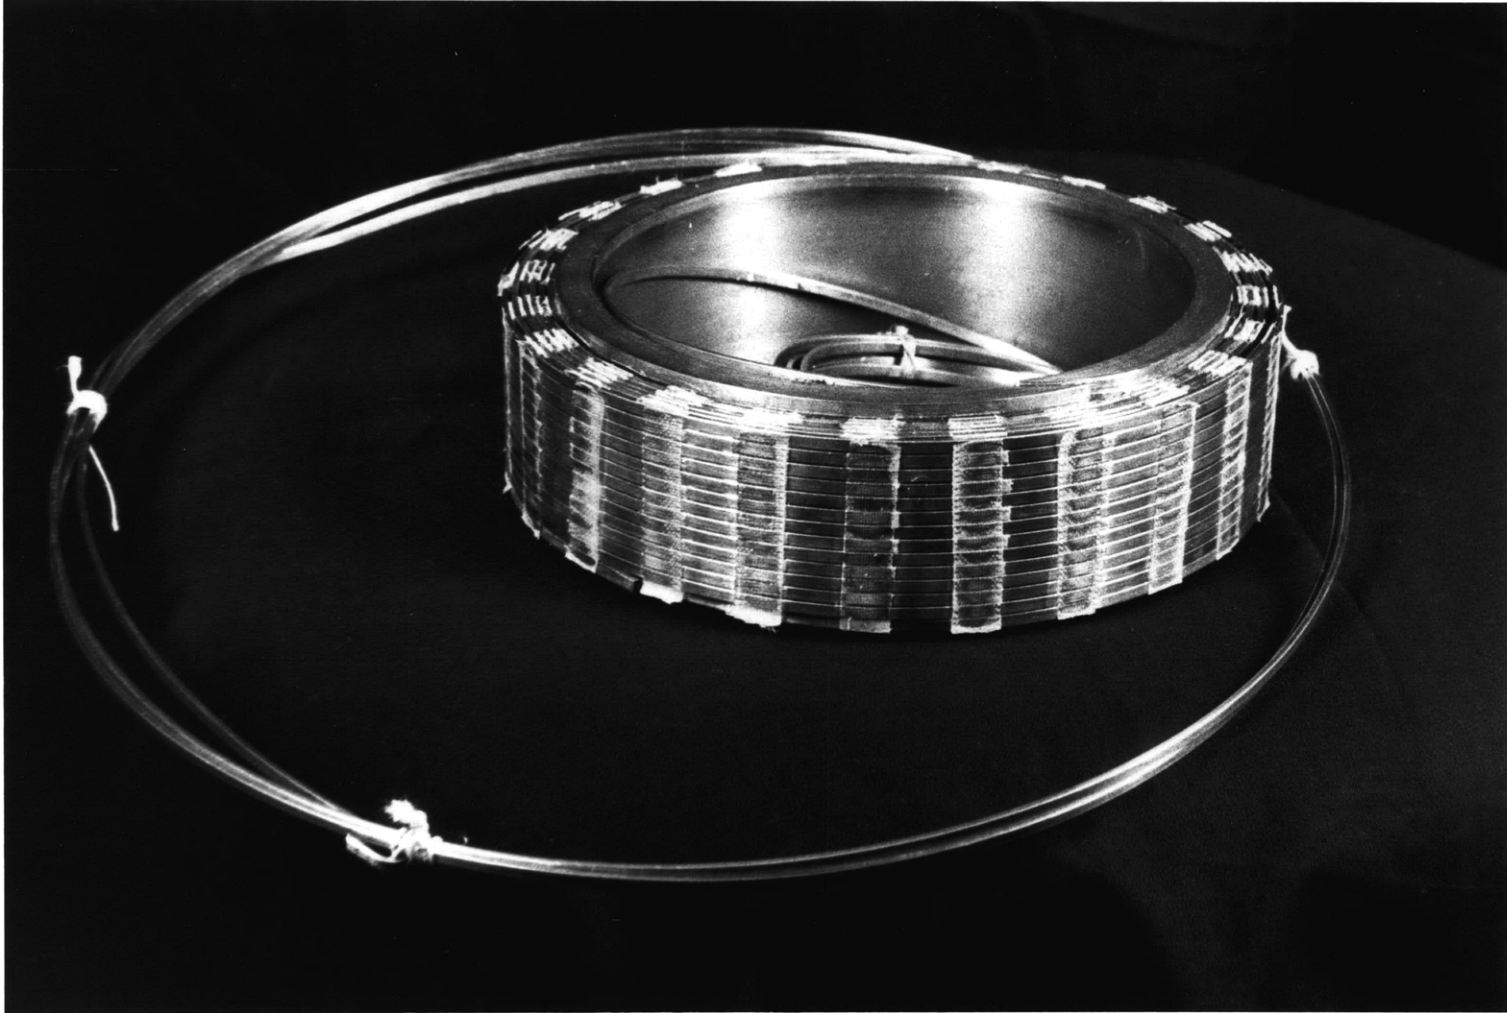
Completed coil showing all six cured layers, still mounted on the winding mandrel.
